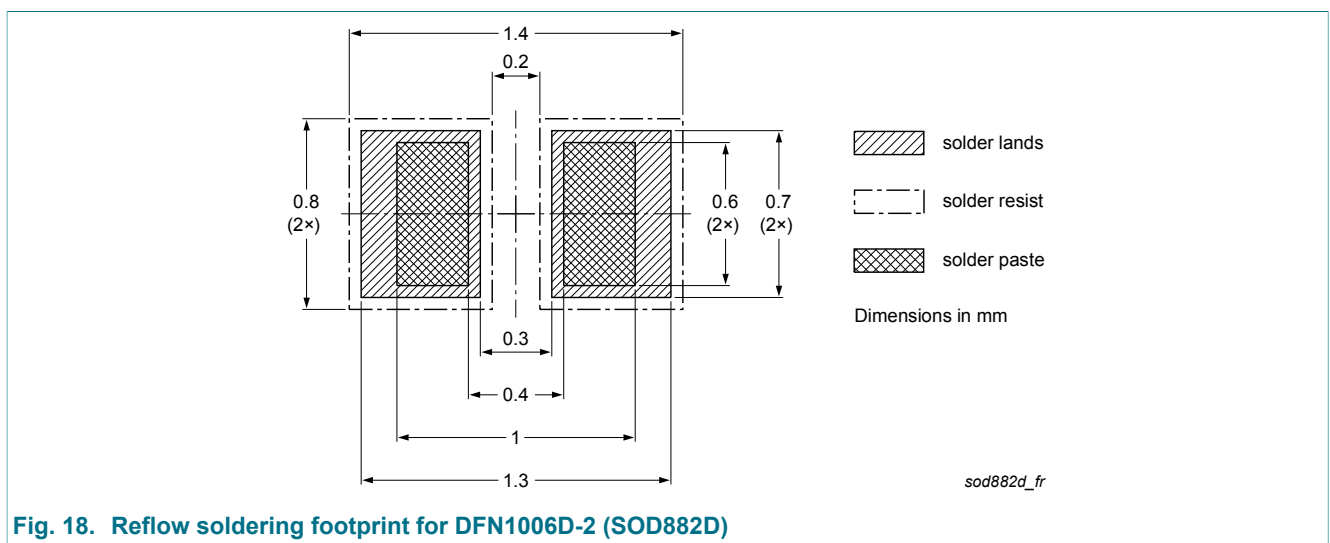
Reflow soldering footprint for DFN1006D-2 (SOD882D)
